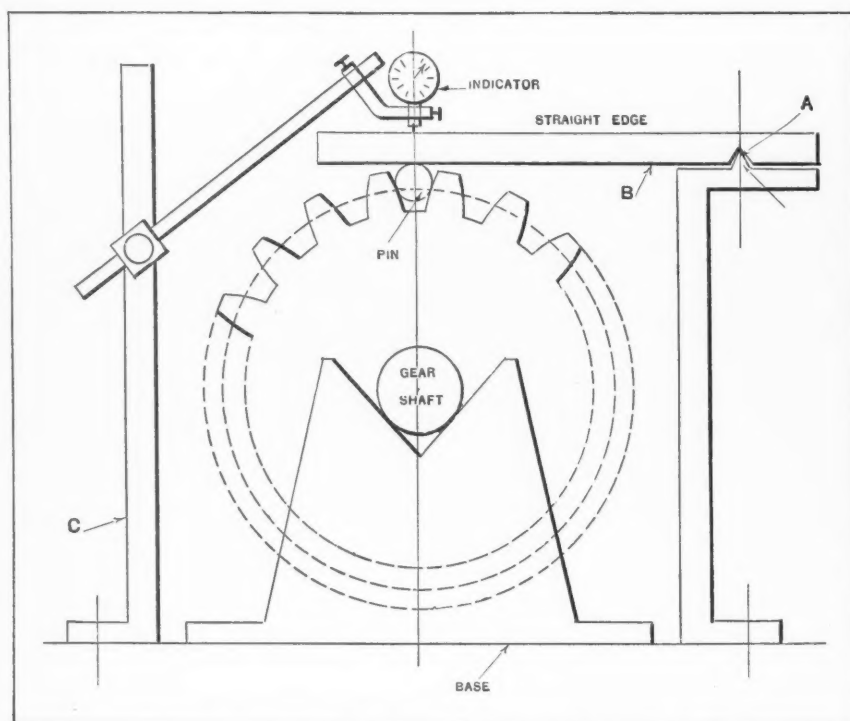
Arrangement for Checking the Concentricity and Uniformity of Spacing of Gear Teeth in Relation to the Axis of the Gear
